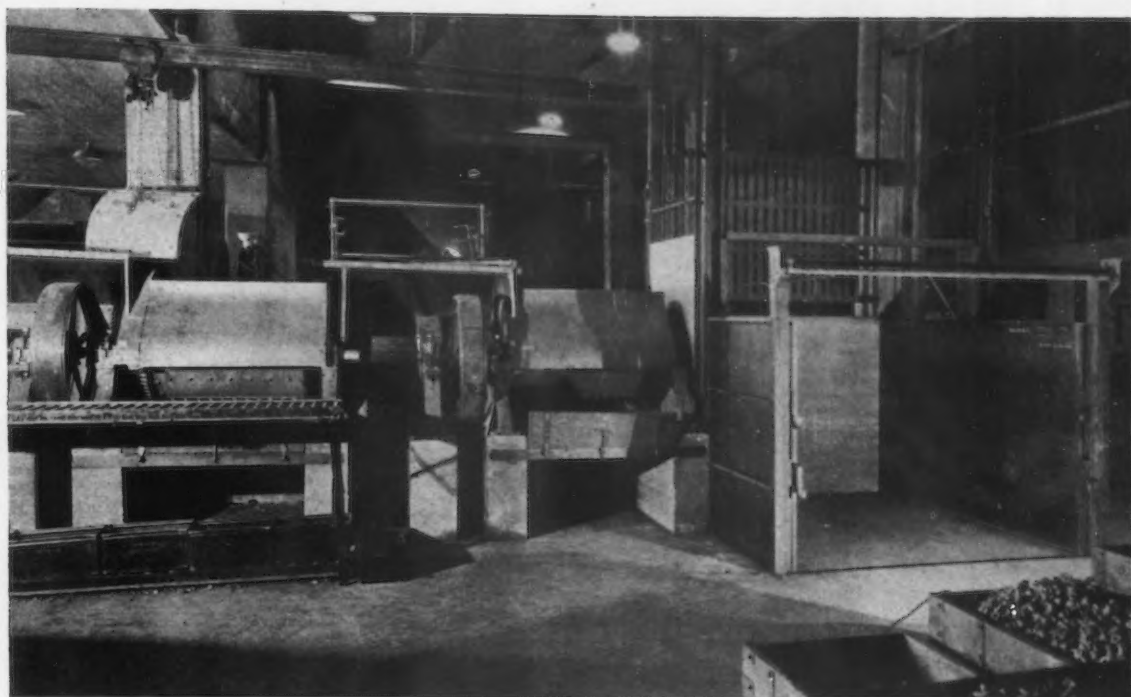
Tumbling Barrels Arranged Around Cleaning Platform. Castings are dumped into the barrels and from the barrels on to the sorting tables. The elevator at the right handles buckets of sprues to and from the platform
